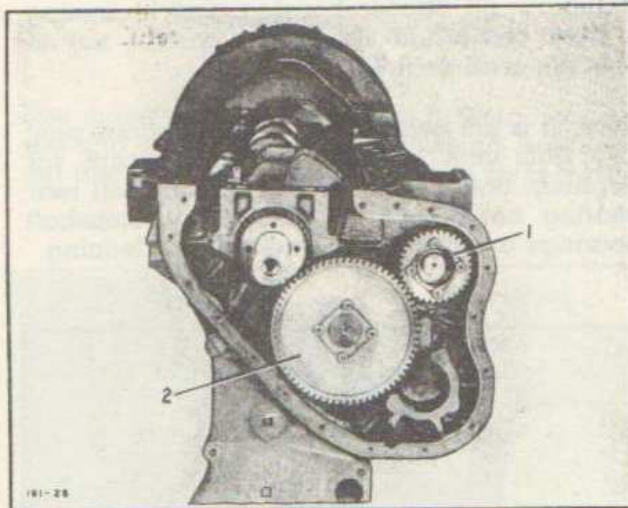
View Identifying Accessory Shaft and Camshaft Gears
